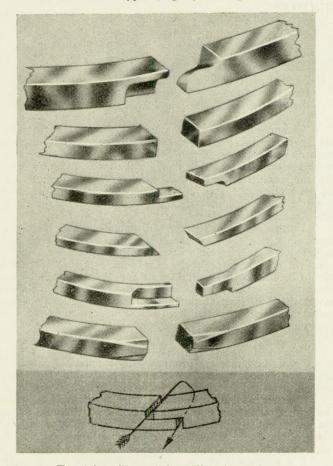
The joints illustrated, reading from the top, are: concave convex, straight cut, step cut, mitre cut, shrouded step or S joint, and ring with chamfered points for ported liners; the bottom illustration shows the passage for gas in a plain step jointed ring
